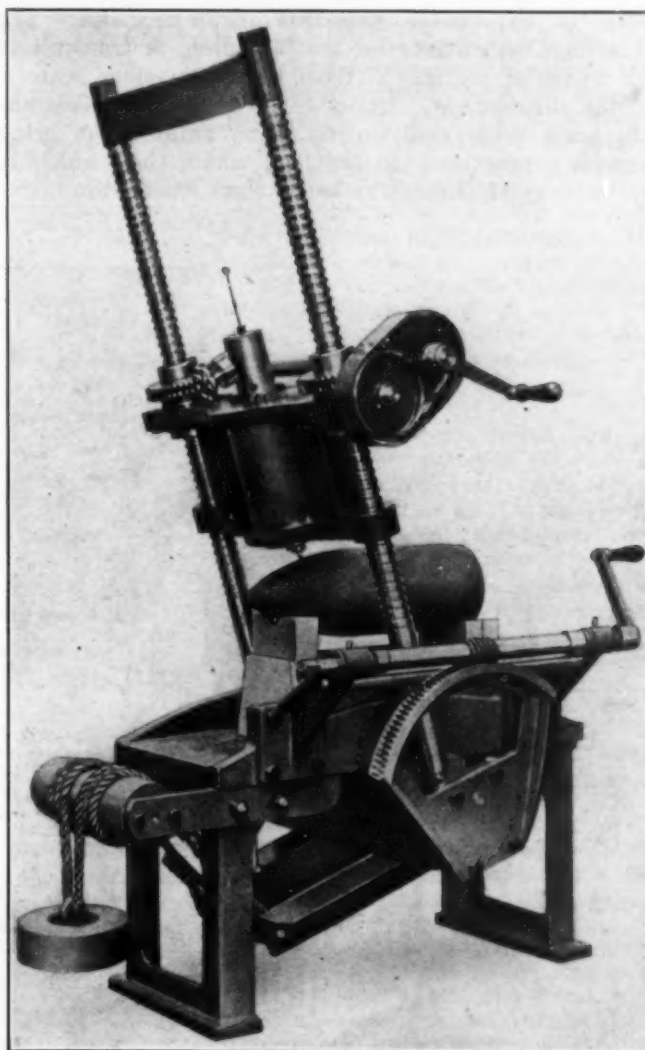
HARDNESS TESTING MACHINE, SWINGING TYPE
